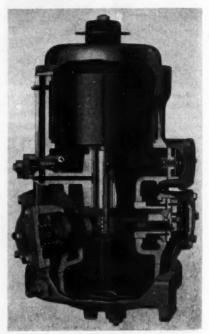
Cut-away view of the 3-HC motorcompressor unit.
